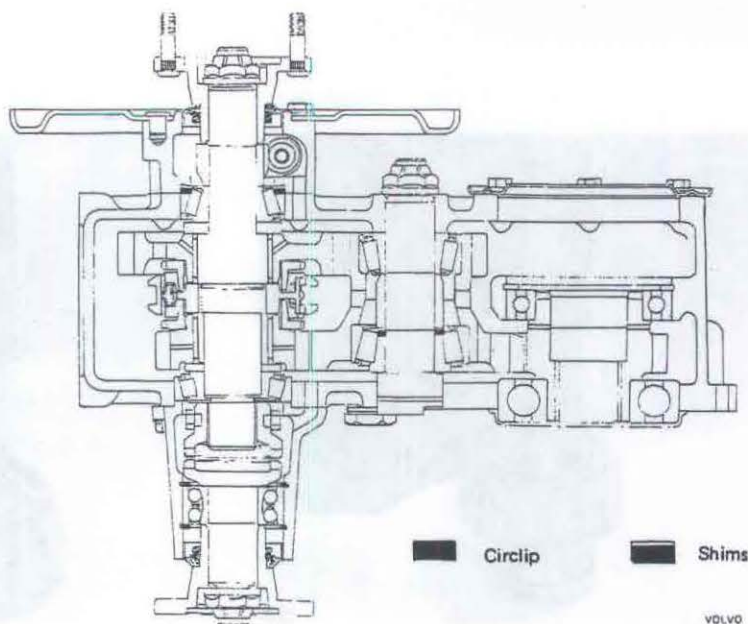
Alternative shims and circlips in auxiliary gearbox
